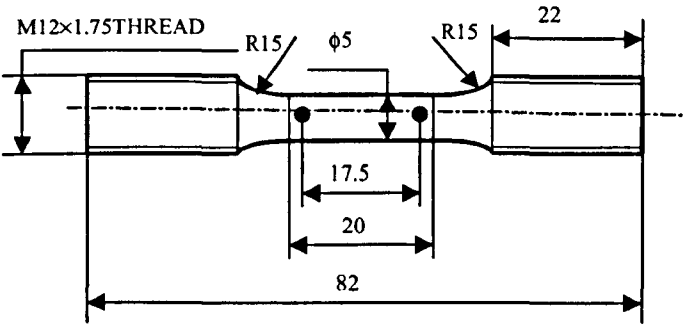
Round section specimen for tension-compression test (unit: mm)
